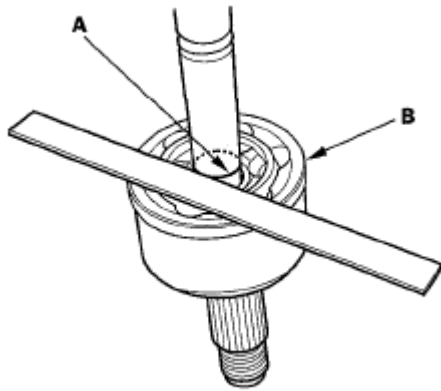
Checking Alignment Of Paint Mark With Outboard Joint End
